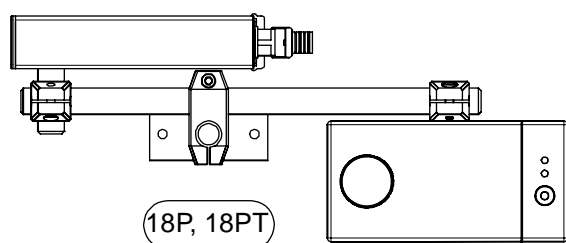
Right-handed printhead housing and parallel reservoir
